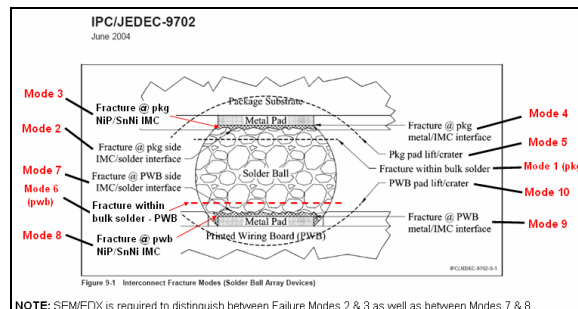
Failure modes in BGA solder joint systems [5]
